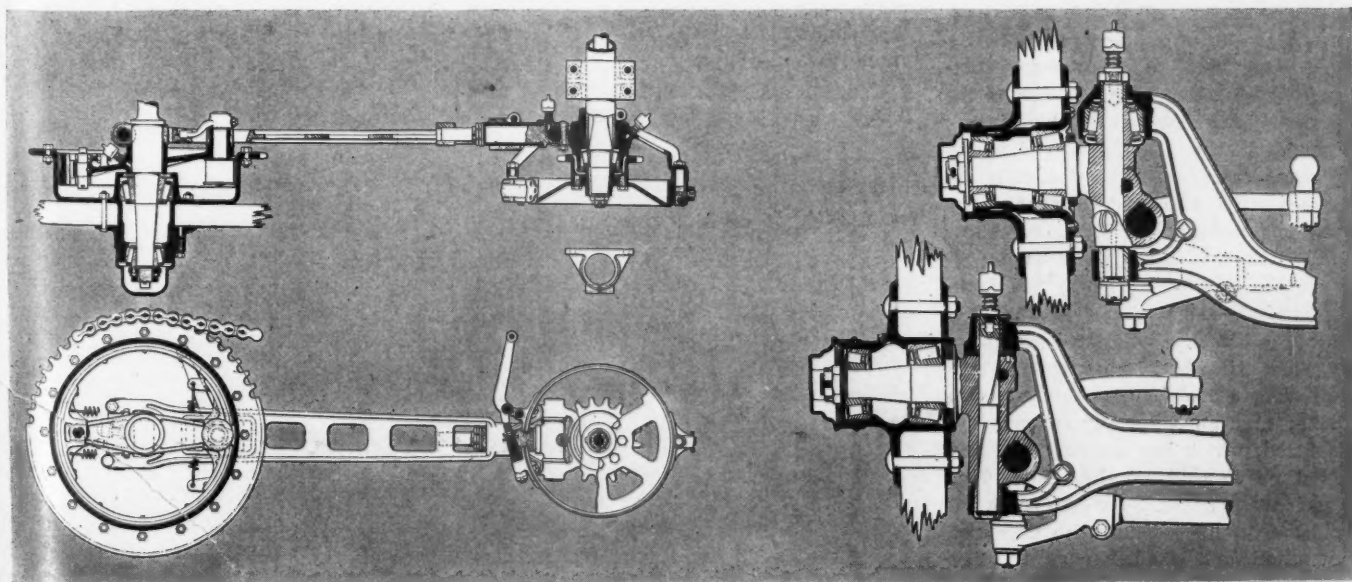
DETAILS OF TRUCK EQUIPMENT DESIGN—SECTIONS OF PLEASURE CAR AXLE ENDS
